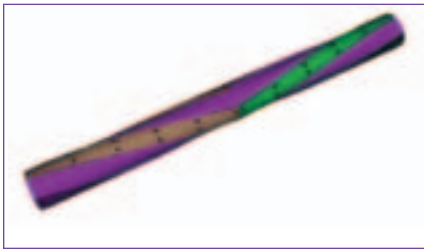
Schematic of a welded assembly that was analyzed using CWM tools.
